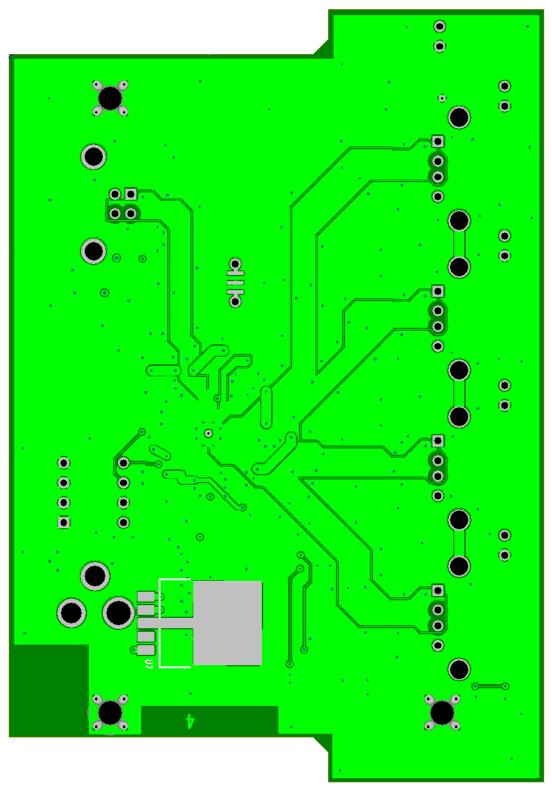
EVB-USB2514Q36-BAS Bottom Layer - Solder Side
